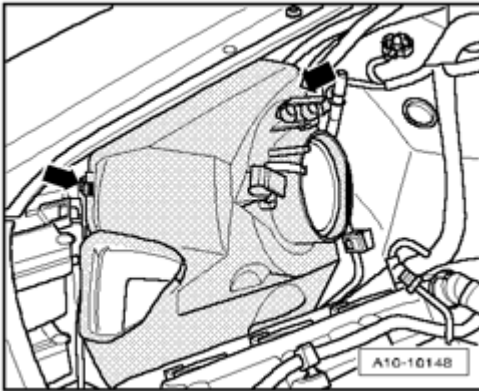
Opening Clips And Removing Upper Part Of Air Filter Housing
